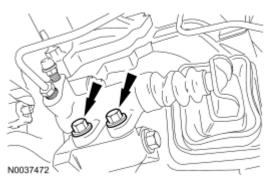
Locating Clutch Slave Cylinder Bolts Courtesy of FORD MOTOR CO.
